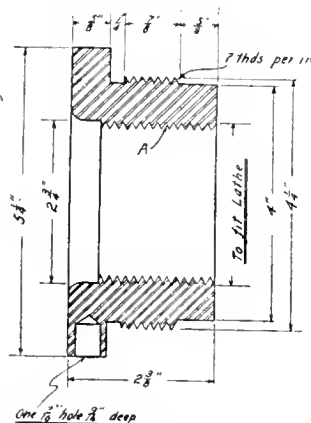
CHUCK FOR HOLDING BUTT END OF SHELL WHILE BODY OF LATTER IS BEING GROUND.
